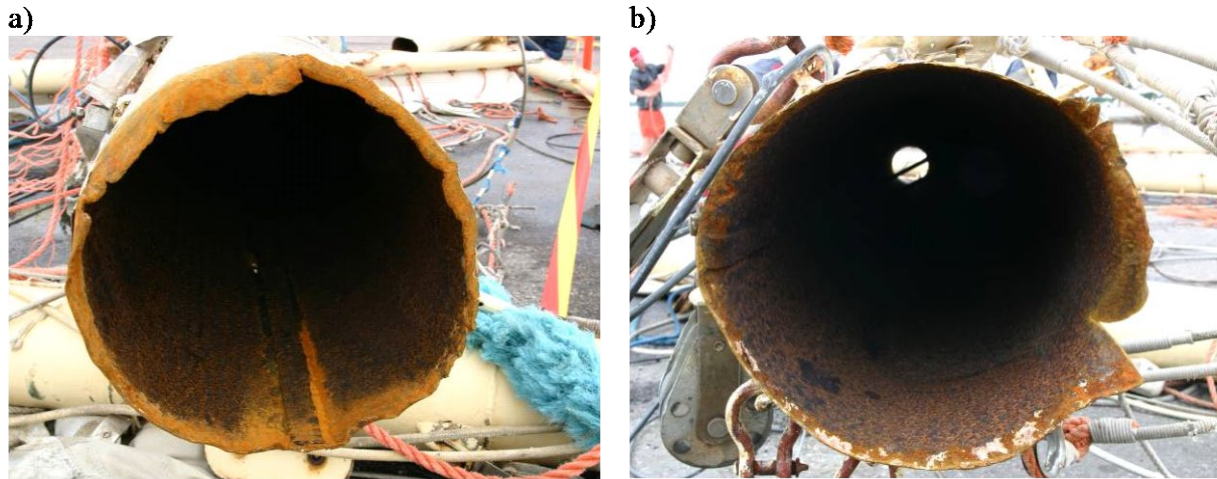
Examples of the clear sharpness at the bottom parts of the broken tubes: a) foremast; b) mainmast.
